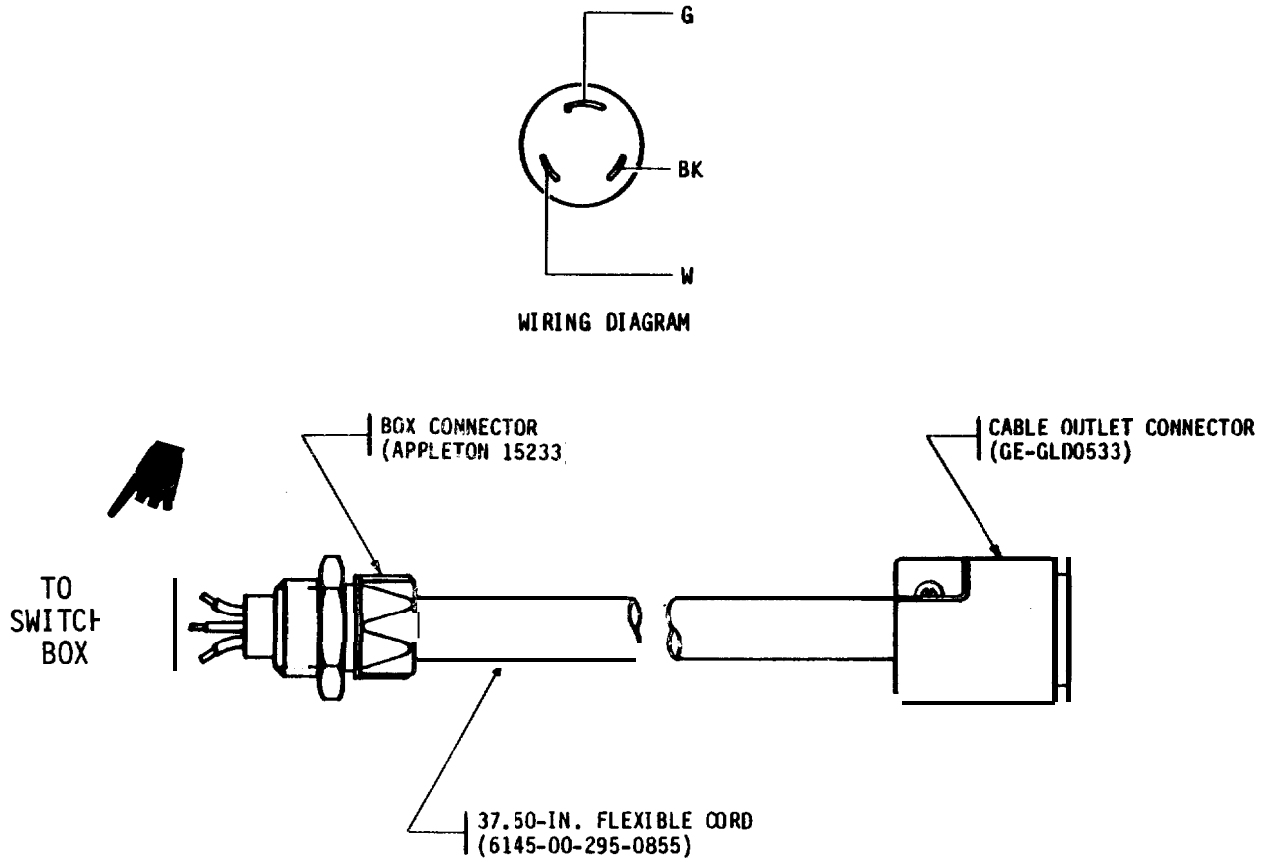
r cable assembly, 11021166, unit 2, M35A2.
